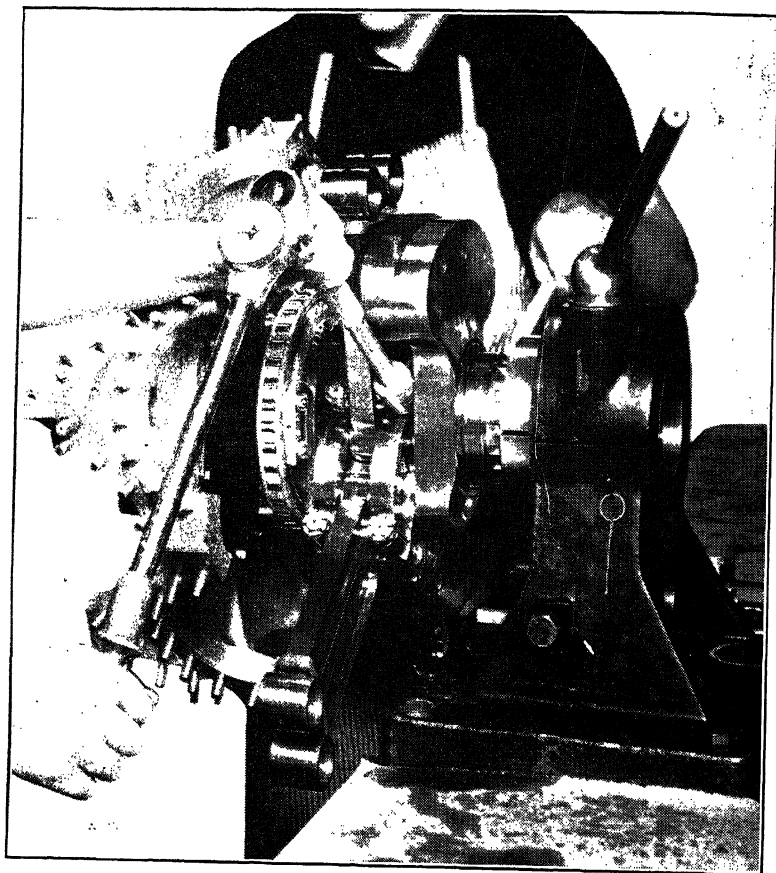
Using a torque wrench for tightening a master rod cap screw.
